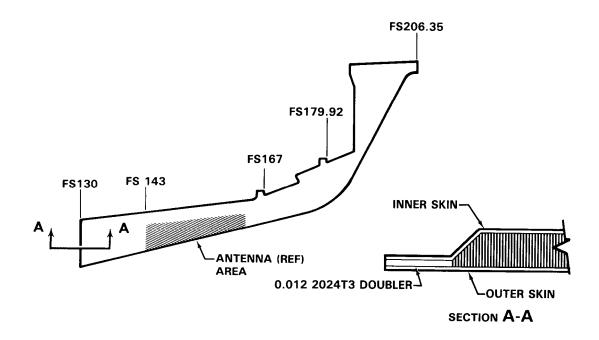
Honeycomb Panels – Lower Aft Fuselage Repair (Sheet 1 of 2)
